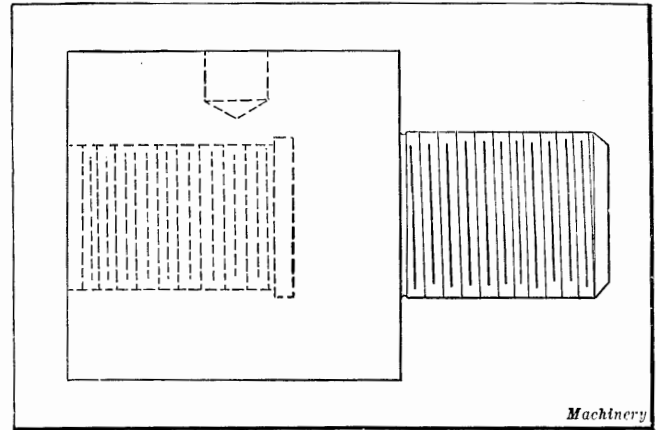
Adapter Which Enables a Standard Chuck to Be Used on Any Spinning Lathe
